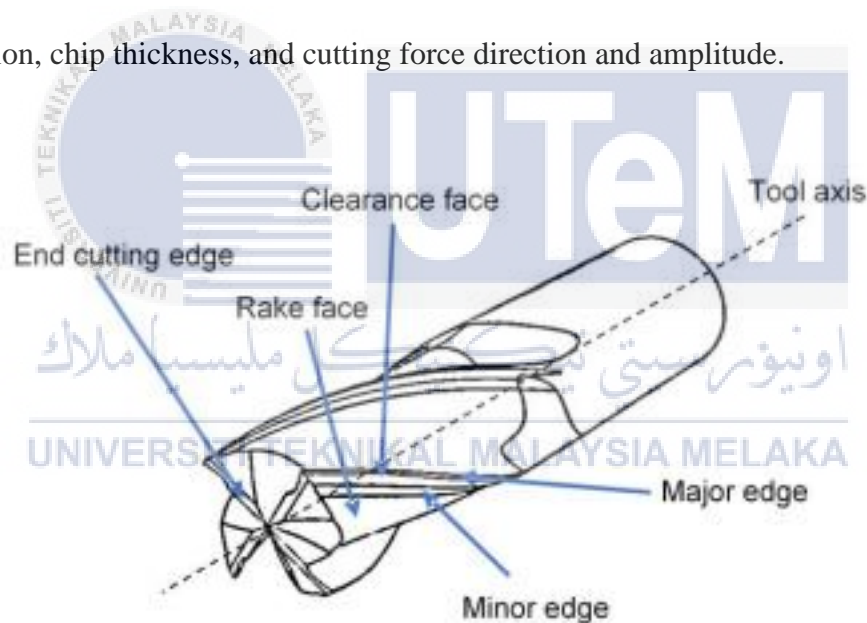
Cutting Tool Geometry (John O'Hara 2019).
